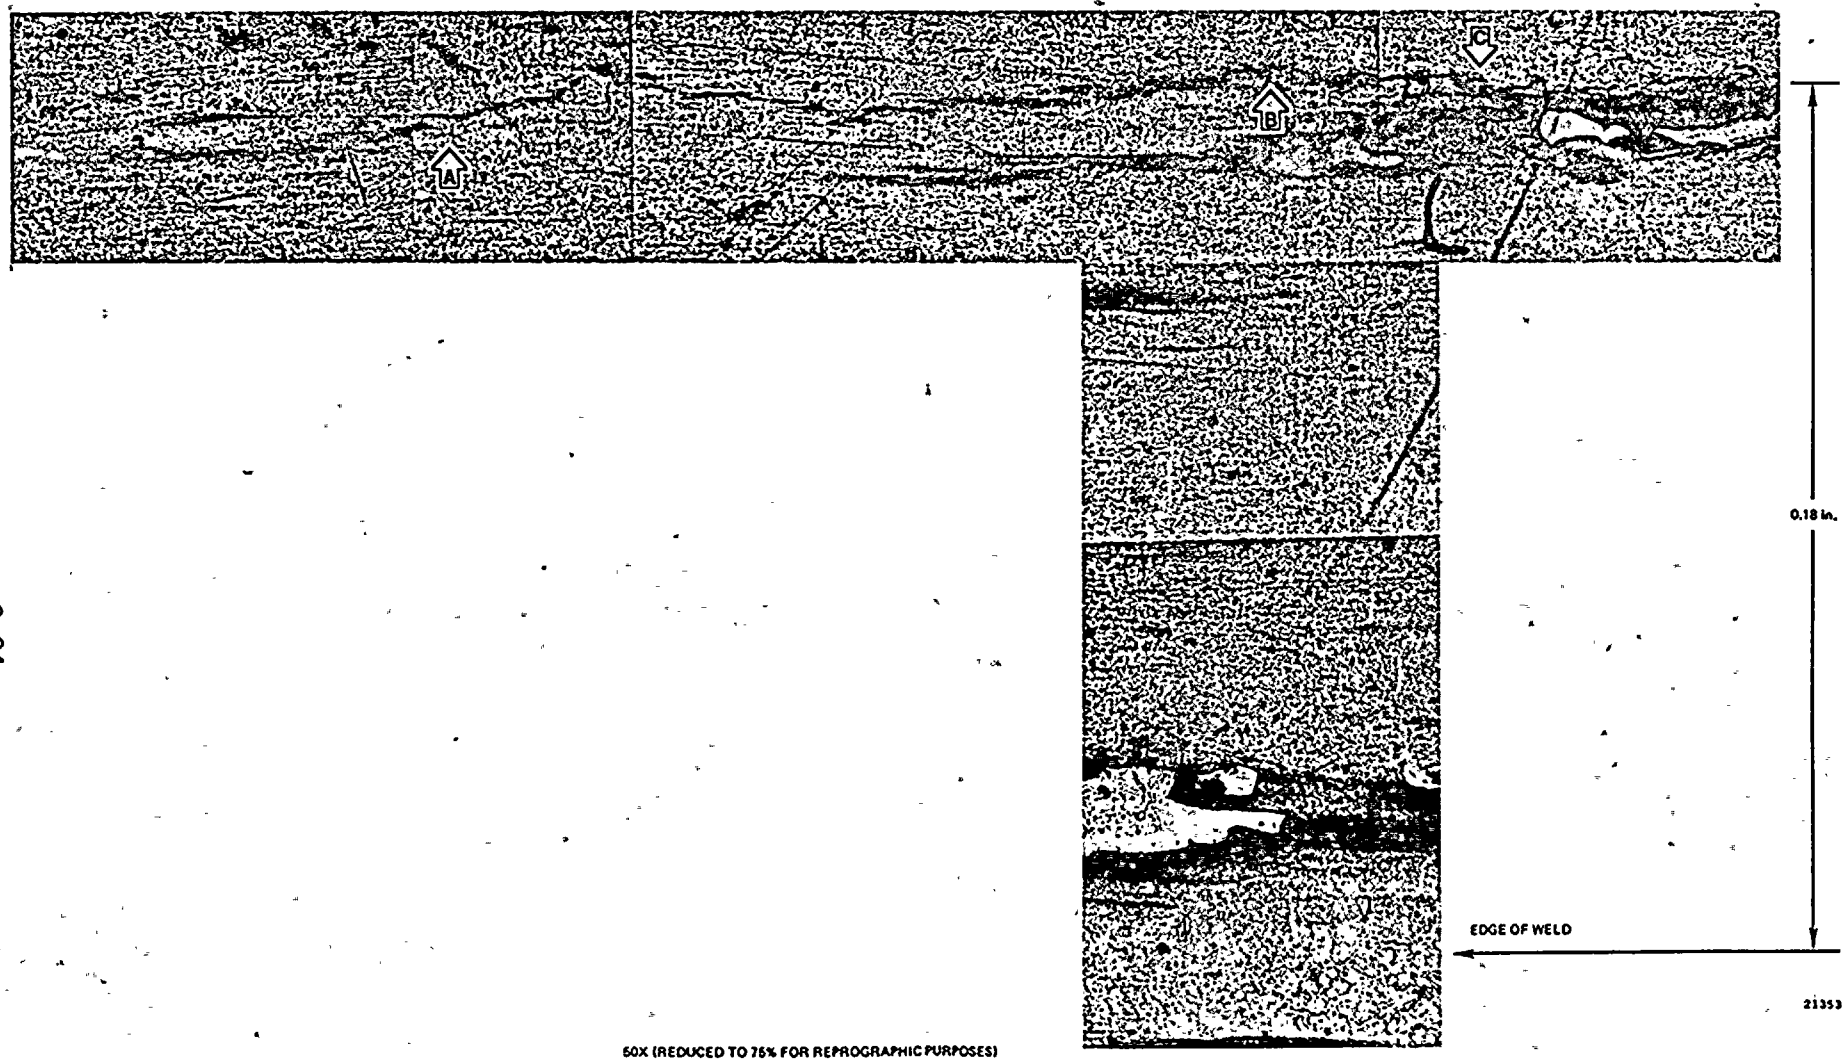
Composite Photograph of Intergranular Crack in Weld Heat Affected Zone (HAZ) at 9:00 Azimuth.
